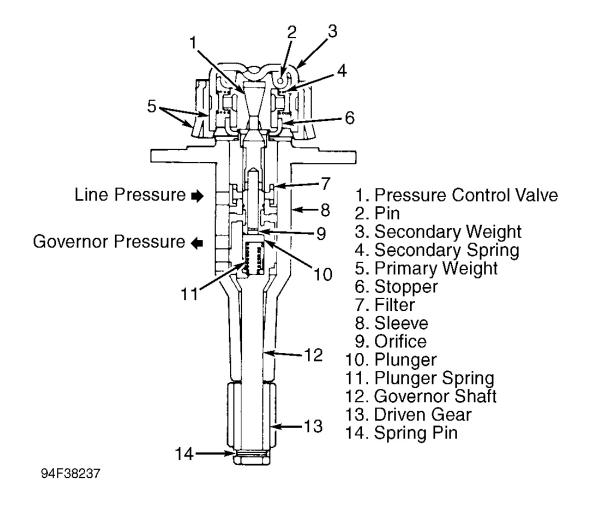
Exploded View Of Governor Assembly Courtesy of GENERAL MOTORS CORP.
